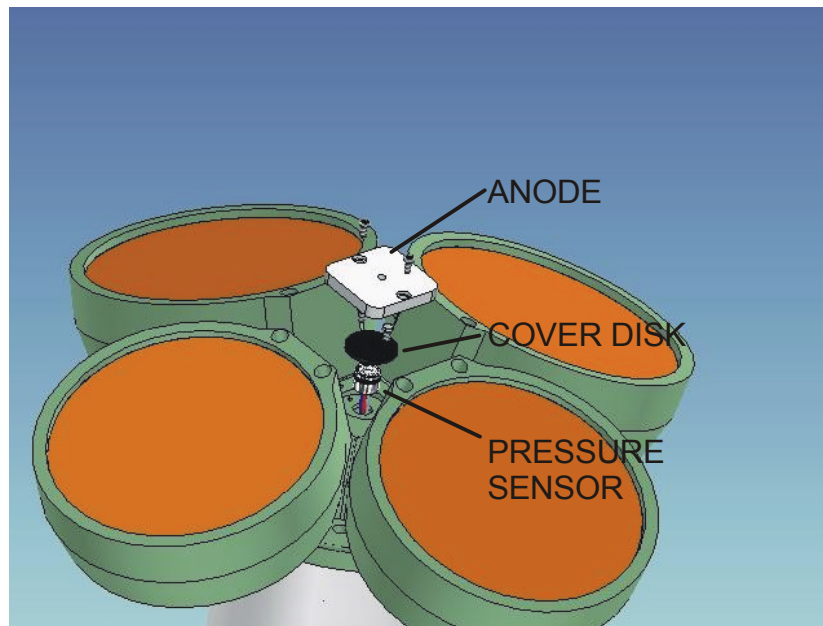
Long Ranger Pressure Sensor (Exploded View)
